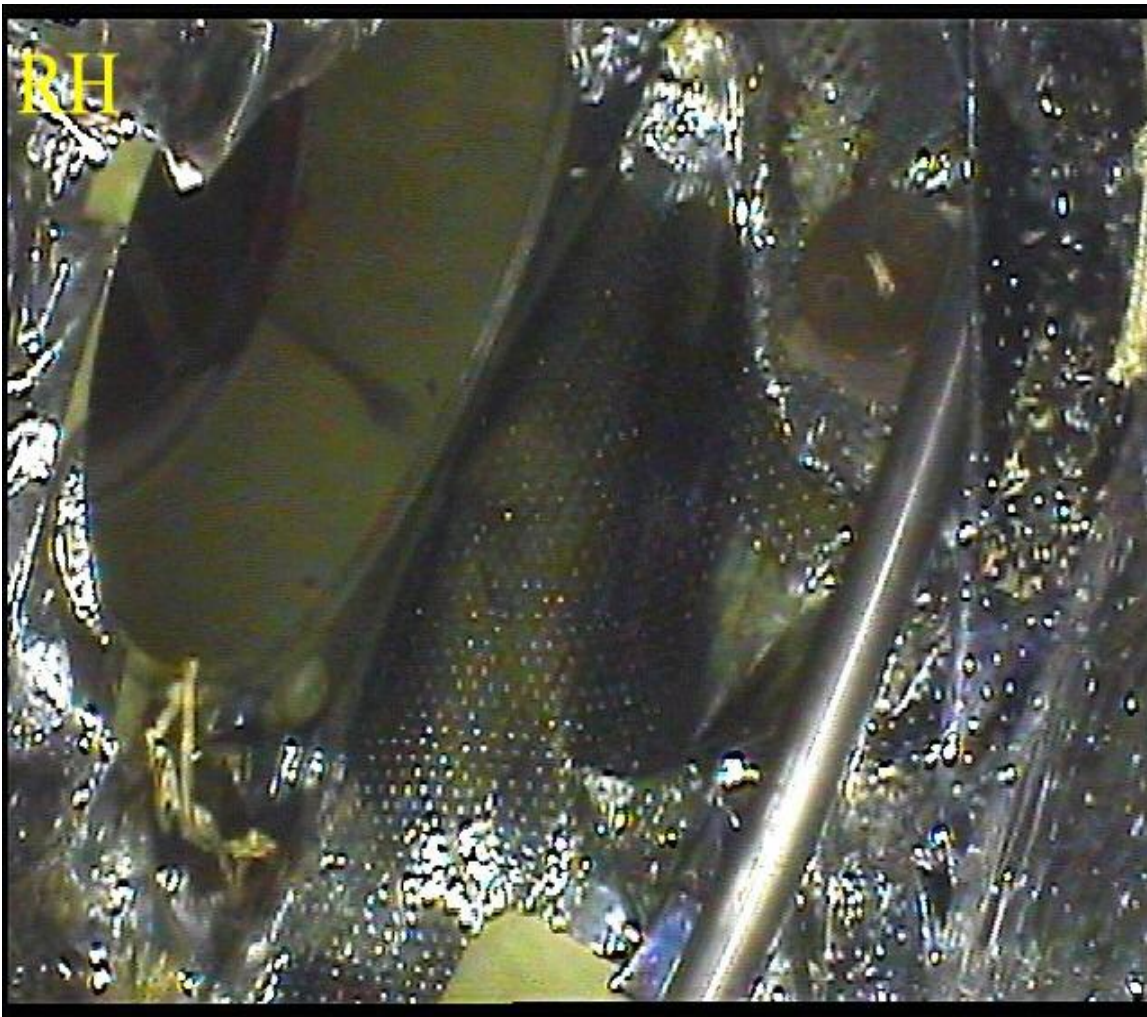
Boroscope view of RH Xo 378 purge vent after repositioning of blanket (SPC # 90790)
